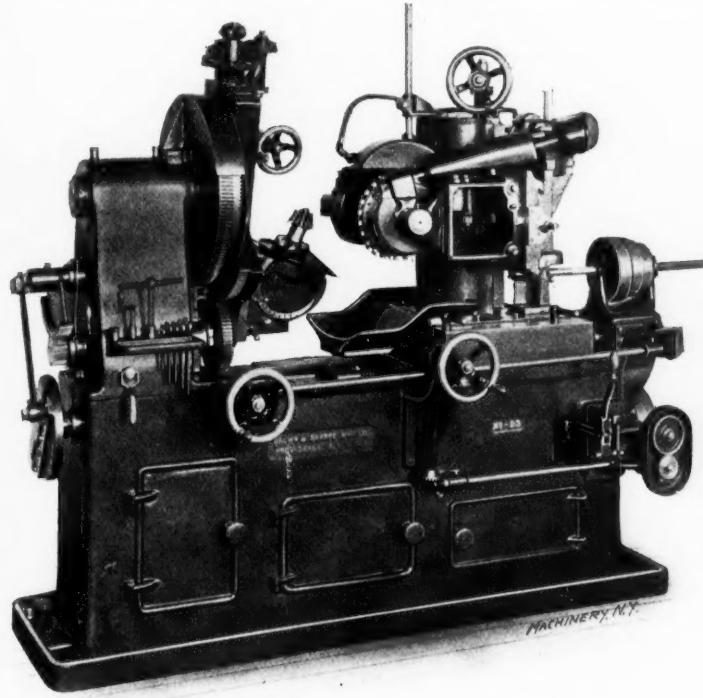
Brown & Sharpe Bevel Gear Generating Machine, cutting the Teeth by the Use of Interlocking Milling Cutters of Large Diameter.
